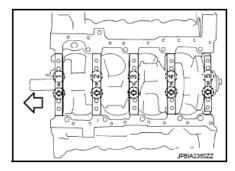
Locating Main Bearing Caps Identification Numbers Courtesy of NISSAN NORTH AMERICA, INC.
